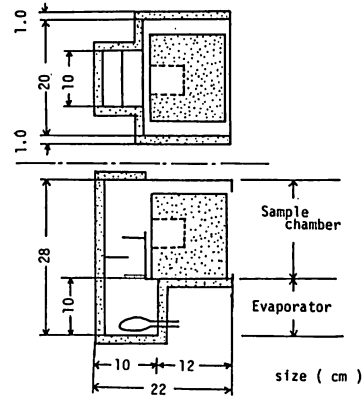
Detail of a thawing vessel for vacuum thawing.
